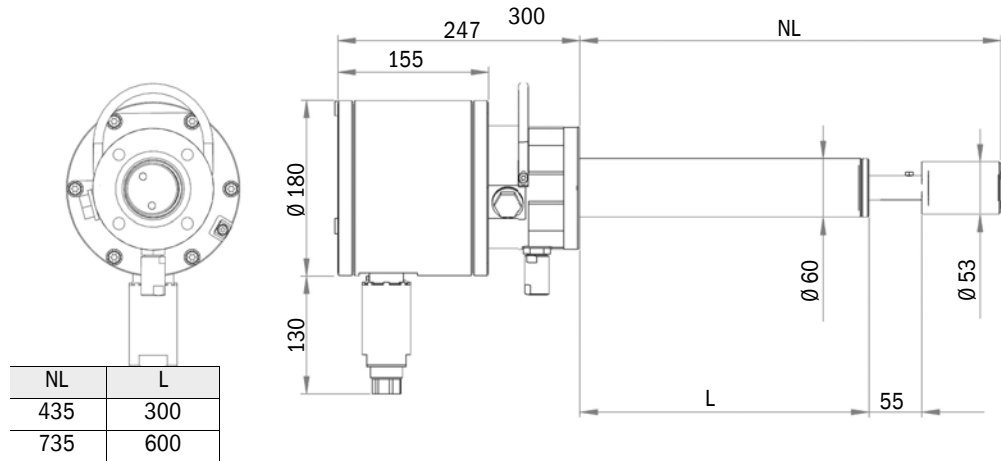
Dimensions, sender/receiver unit DUSTHUNTER SP100 Ex-2K
